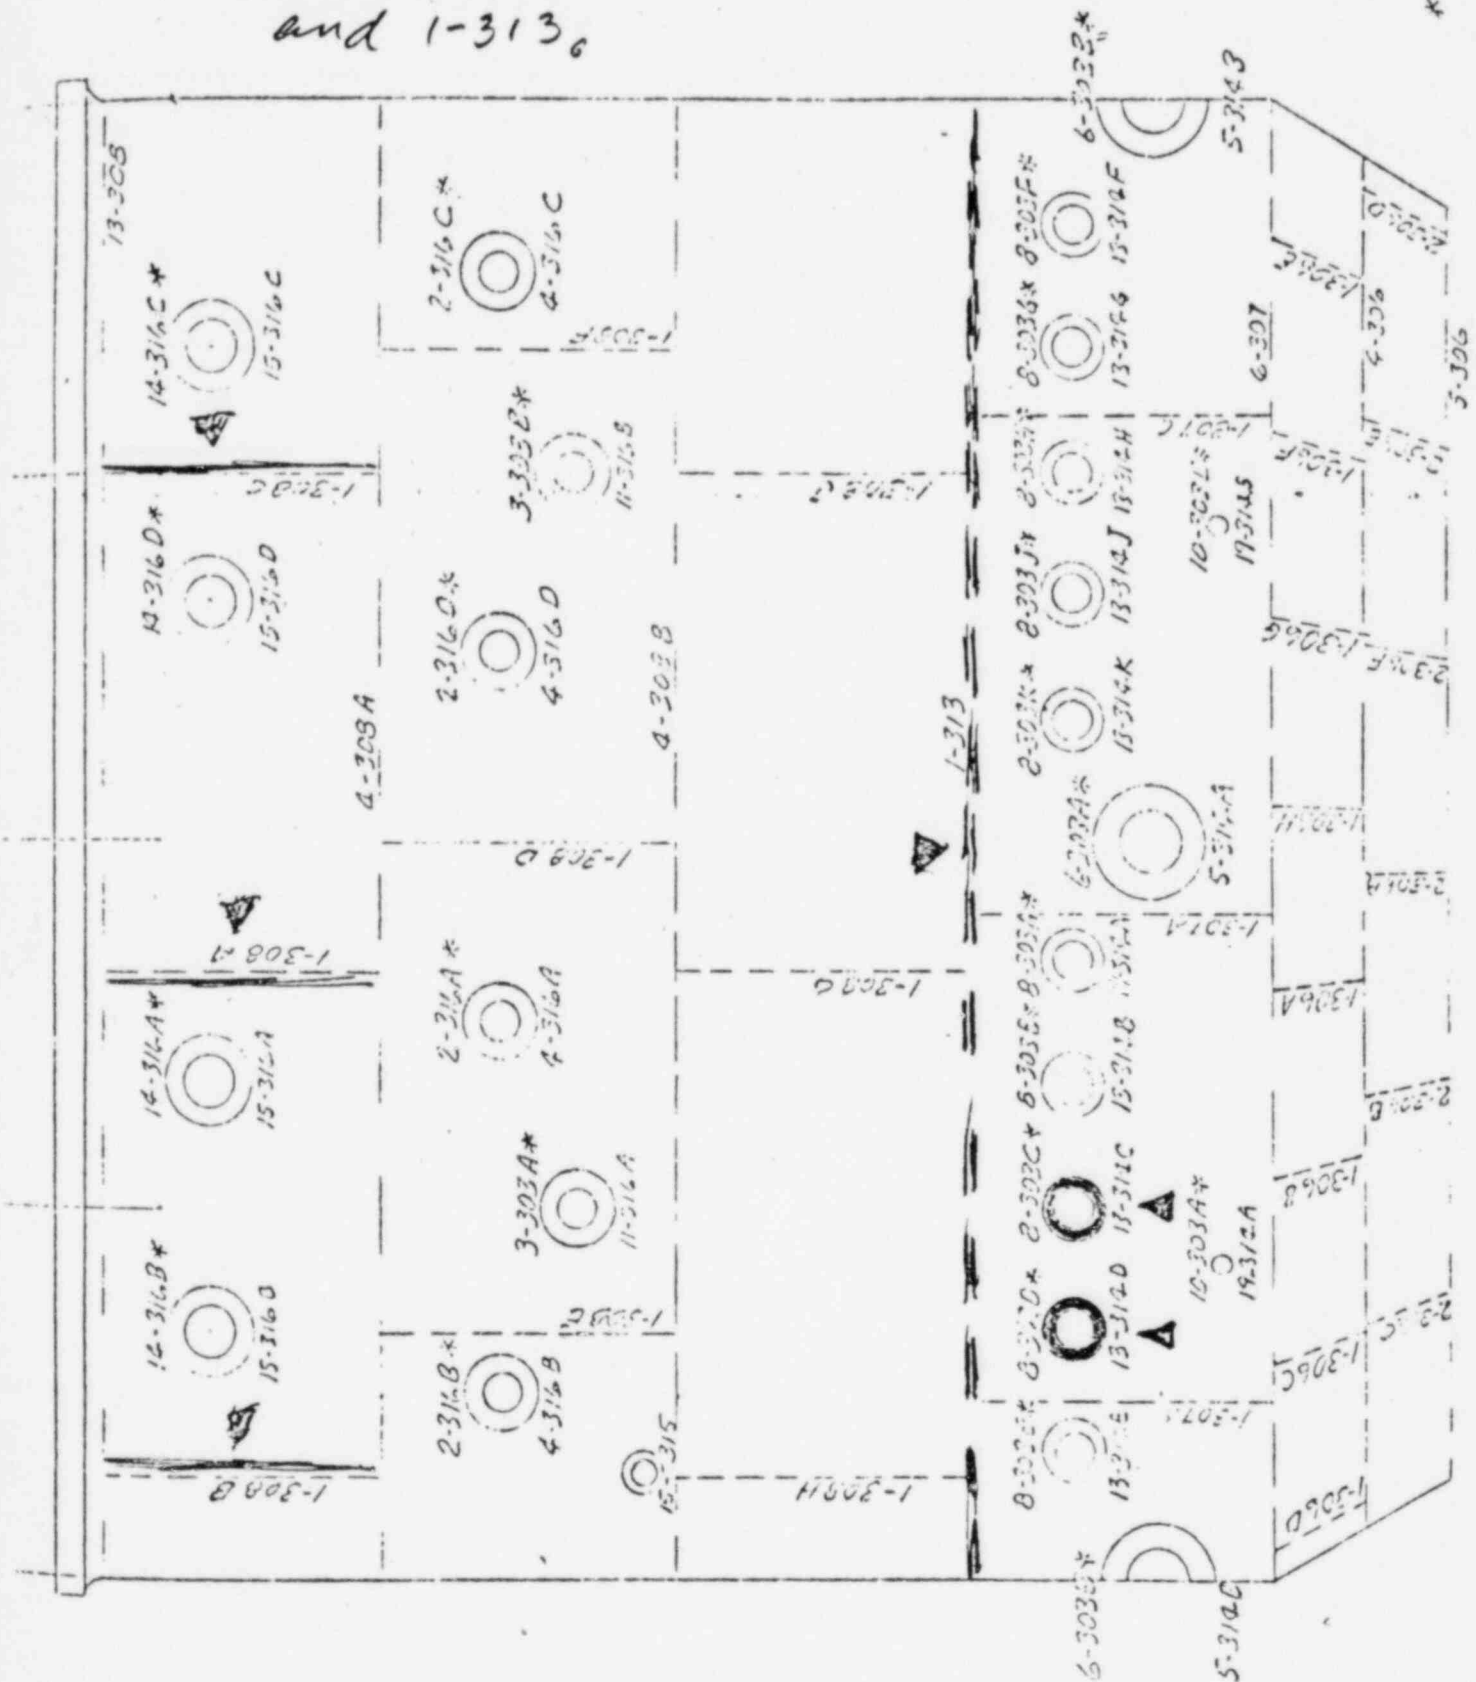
Shoreham RPV Weld Identification showing Welds selected for RT Data Review.
